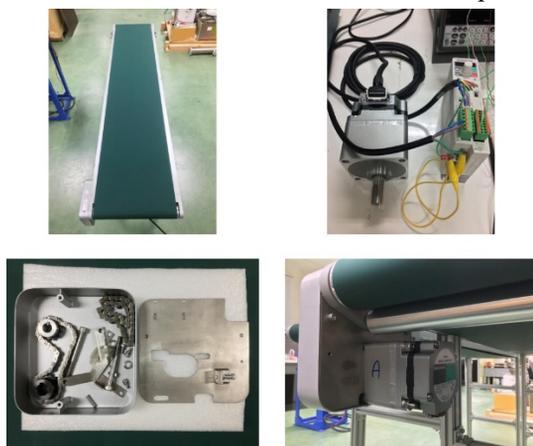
(top left) Conveyor belt, (top right) BLDC motor and driver, (bottom left) custom motor fixtures of the prototype, (bottom right) motor installation.
